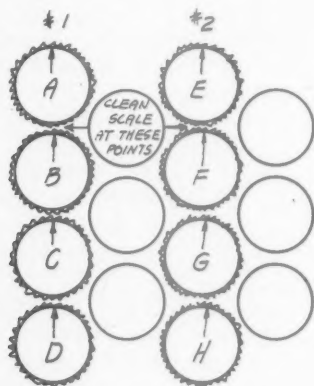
Section of flue sheet illustrating flue-welding procedure
